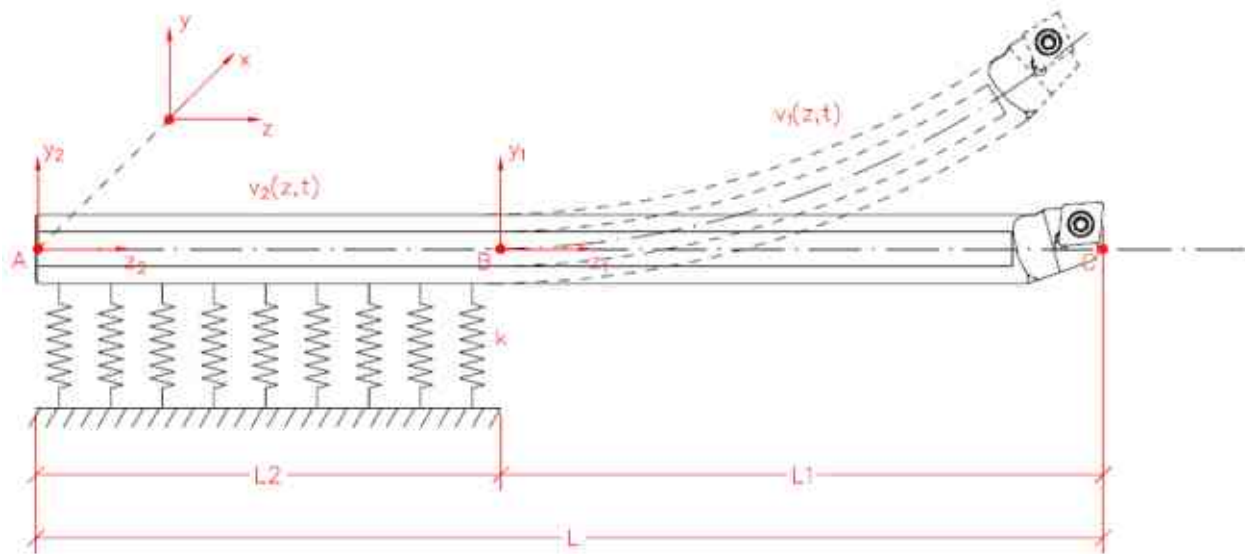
Mechanical model for a standard boring bar partially resting on a Winkler foundation
